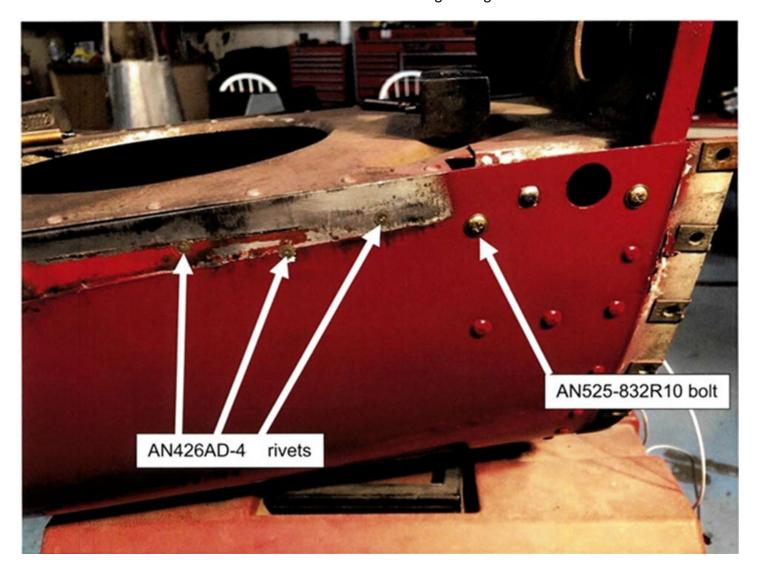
View after installing AN525-832R10 bolt and three MS20426AD4 flush head rivets
